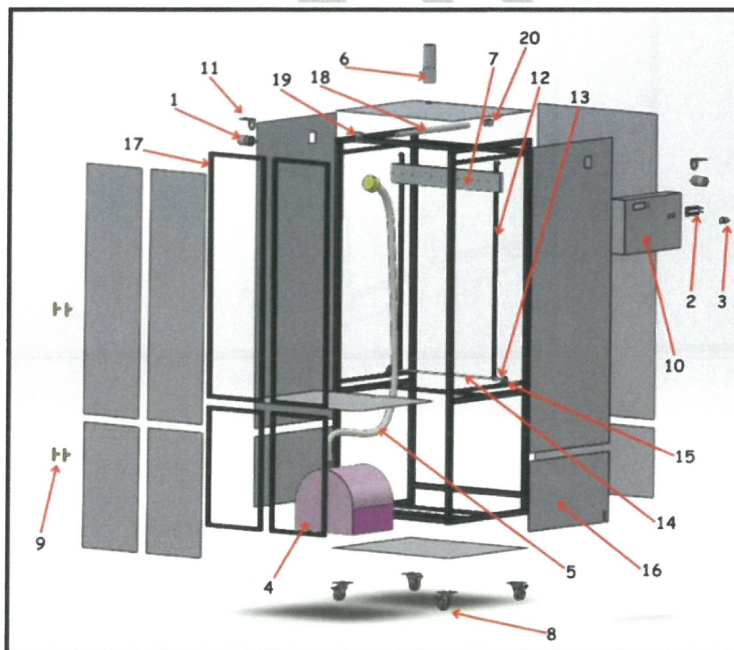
Exploded view of an Automatic Cloth Ironing Machine by Solidworks
